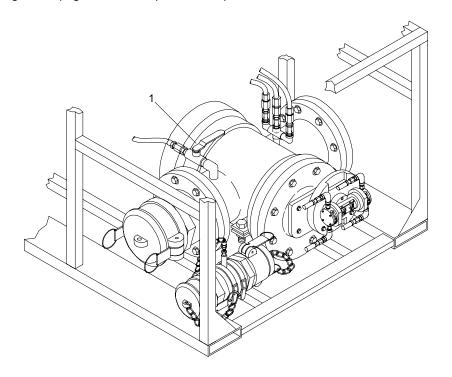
Fuel Additive Injector Assembly Priming Valve.
